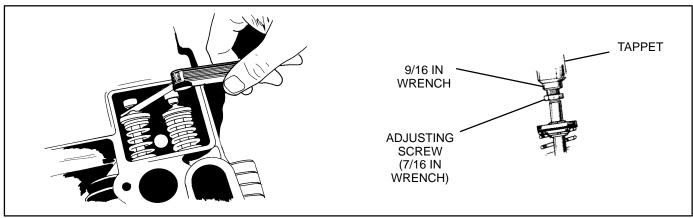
ADJUSTING VALVE CLEARANCE (LASH)
